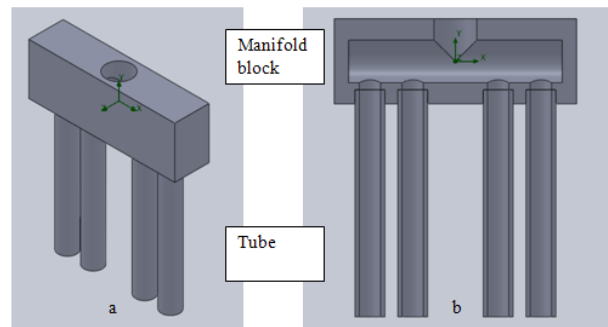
Multi-vacuum manifold with 4 inlets in (a) Isometric view, and (b) Cross section view
